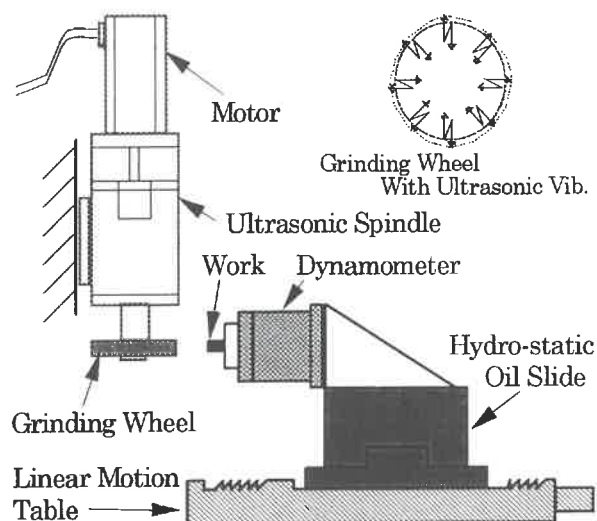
Schematic drawing of ultrasonic vibration assisted shear mode grinding machine
